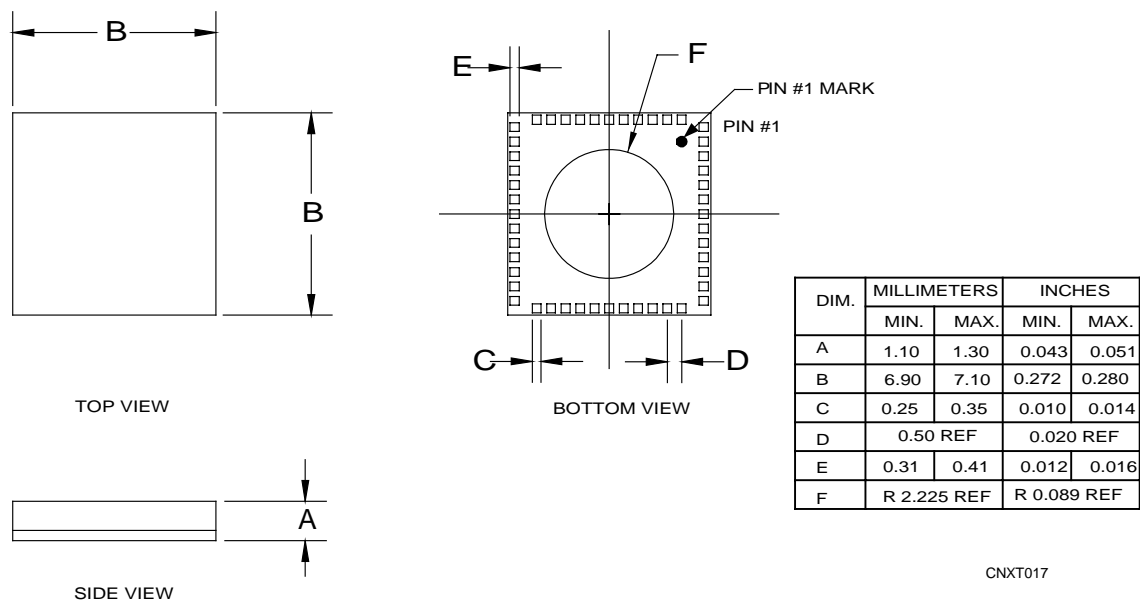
Package Dimensions - 48-pin RF-LGA™ Package
